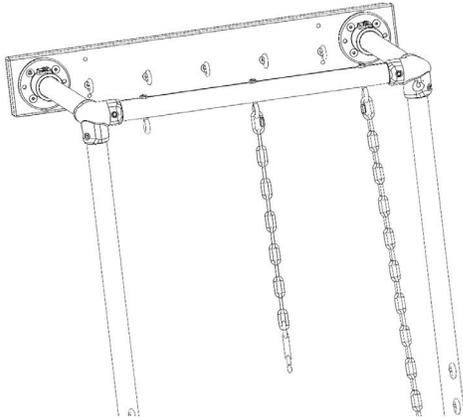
Figure D. Picture of quick link attaching long safety chain to outer eyebolt and short safety chain to center eyebolt.
